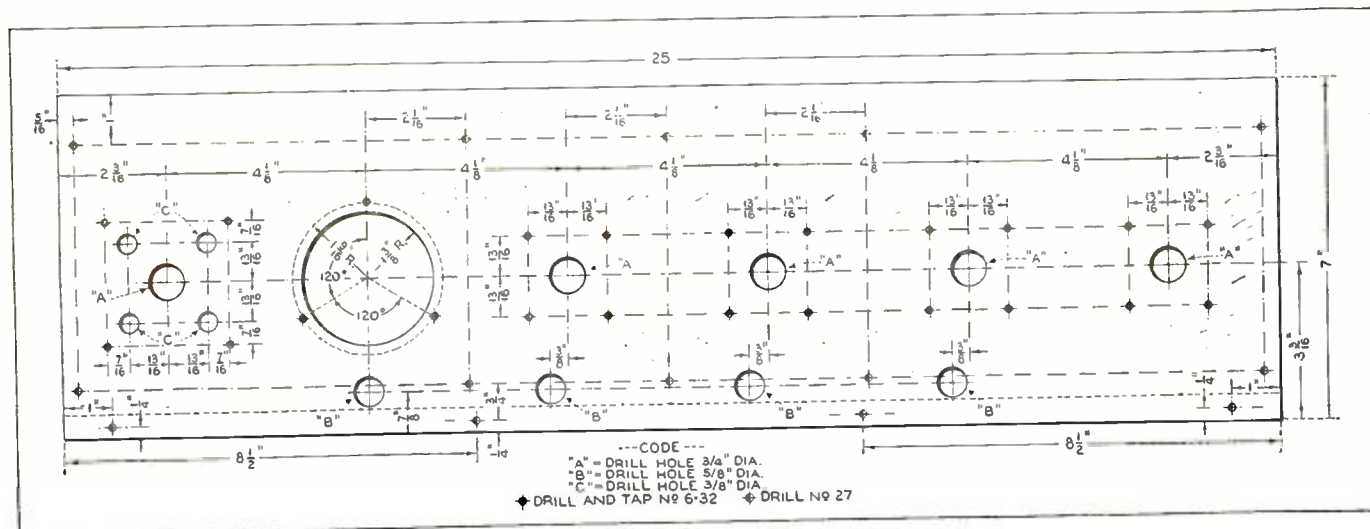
The panel layout, showing all dimensions and the location and sizes of all drill holes
